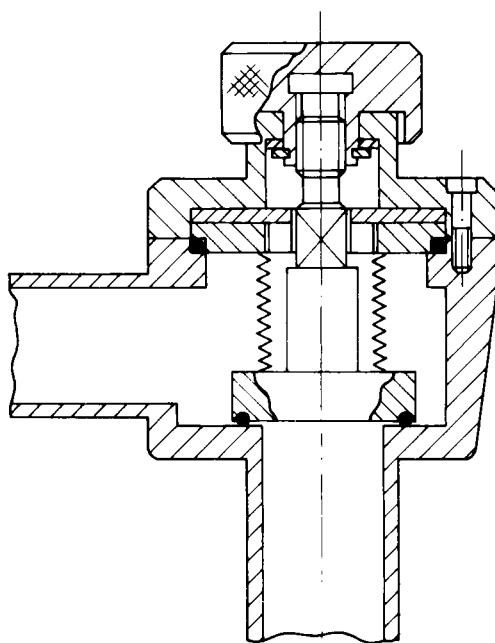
'O'-ring elastomer sealed right-angle valve from Leybold-Heraeus
